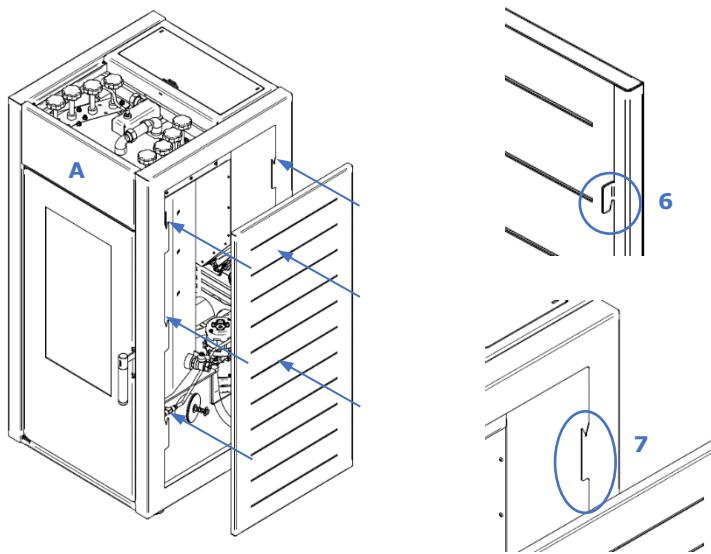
Assembly of the casings Hidro 17 and Hidro 23
